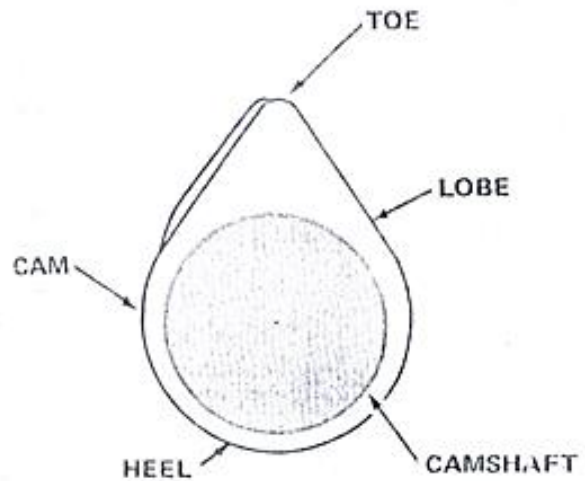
Cam on a camshaft. Note positions of the toe and heel.
